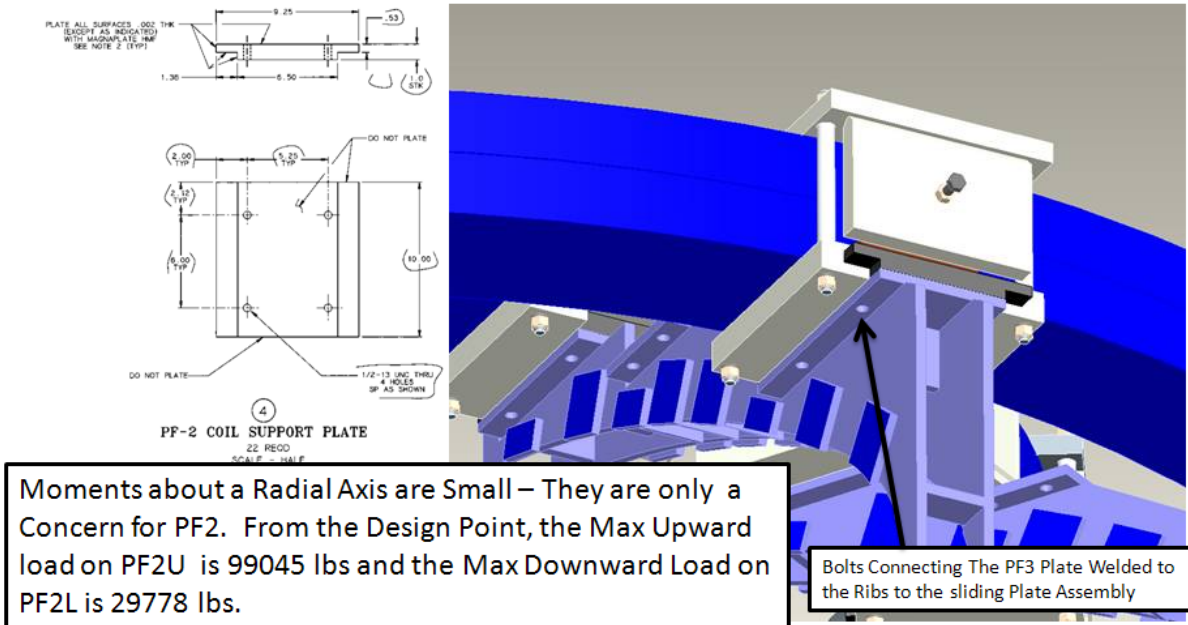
Sliding Block to Welded Plate Bolting
